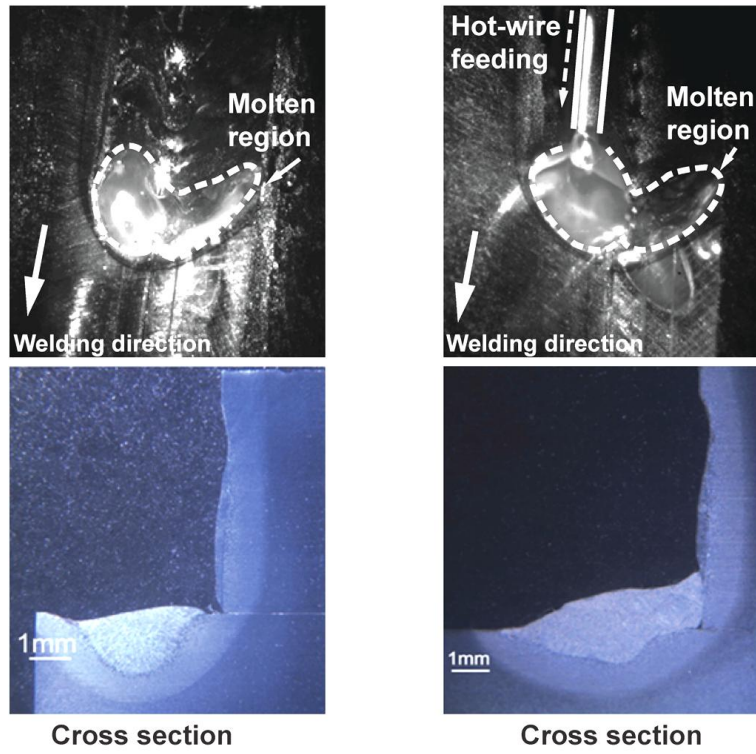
Schematic illustration of Characteristic of hot wire laser welding in a narrow groove.
